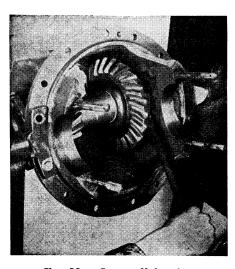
Force off bearing cage with small pinch bar between back of gear and carrier housing (puller screw holes are also provided)
